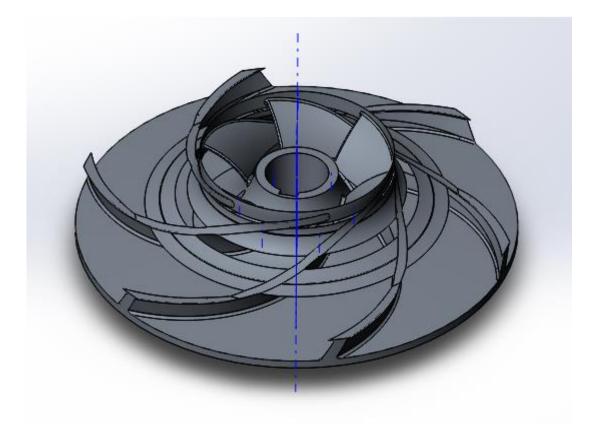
Top surface is removed. It is applicable via high precision cutting machine such as CNC wire cut. It is ready to making core box
